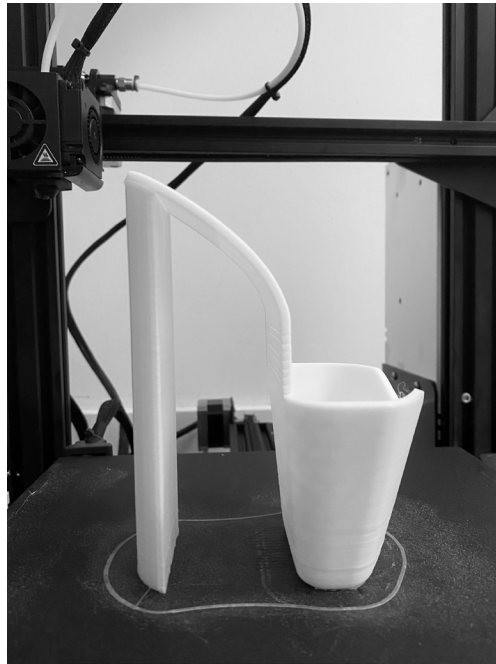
3D Creality Ender 3 Pro printing machine.
